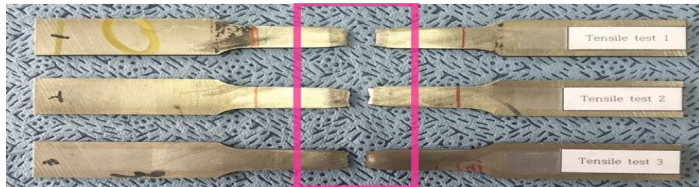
Fractured specimen after STS304L tensile test (3mm)
